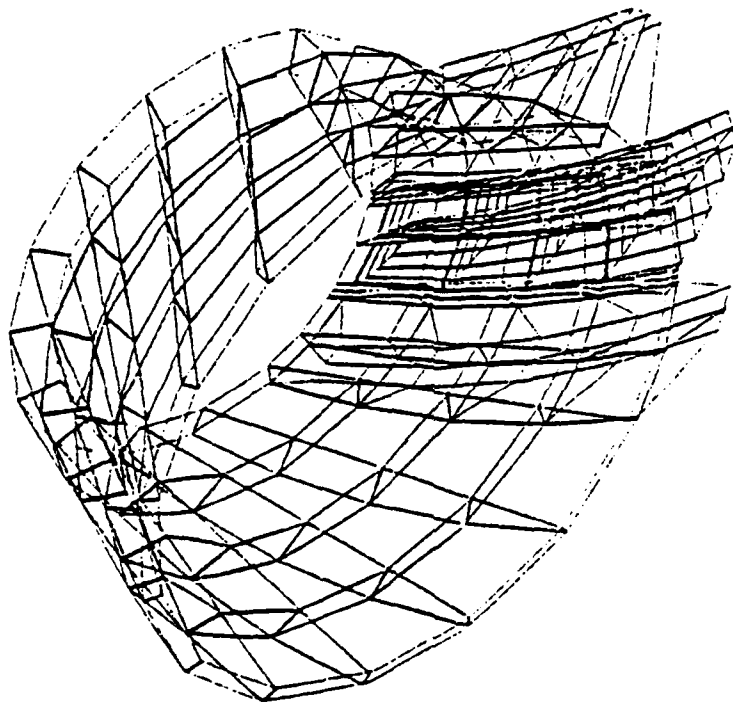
The Elements of Rim And Three Adjacent Teeth of Pinion
